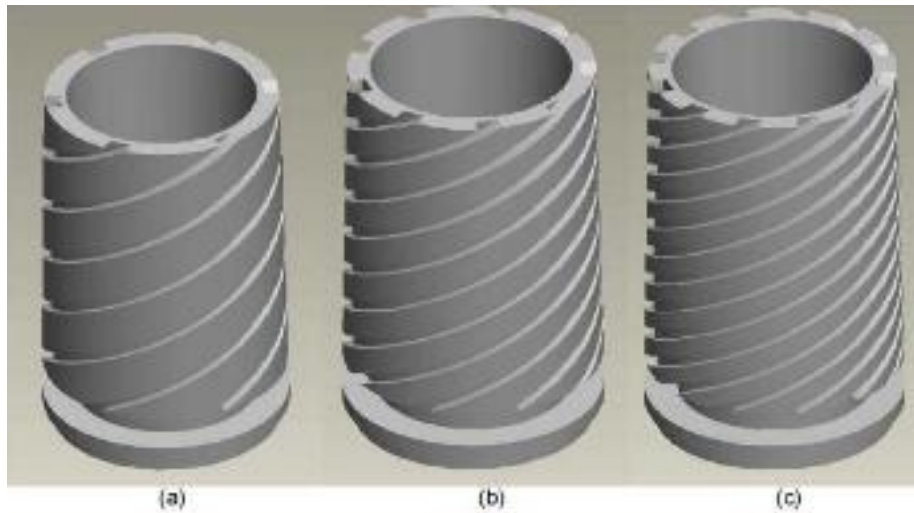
Interchangeable 4" nozzles: (a) six helical paths, (b) nine helical paths, and (c) twelve helical paths (Knisely and Finio, 2010).
